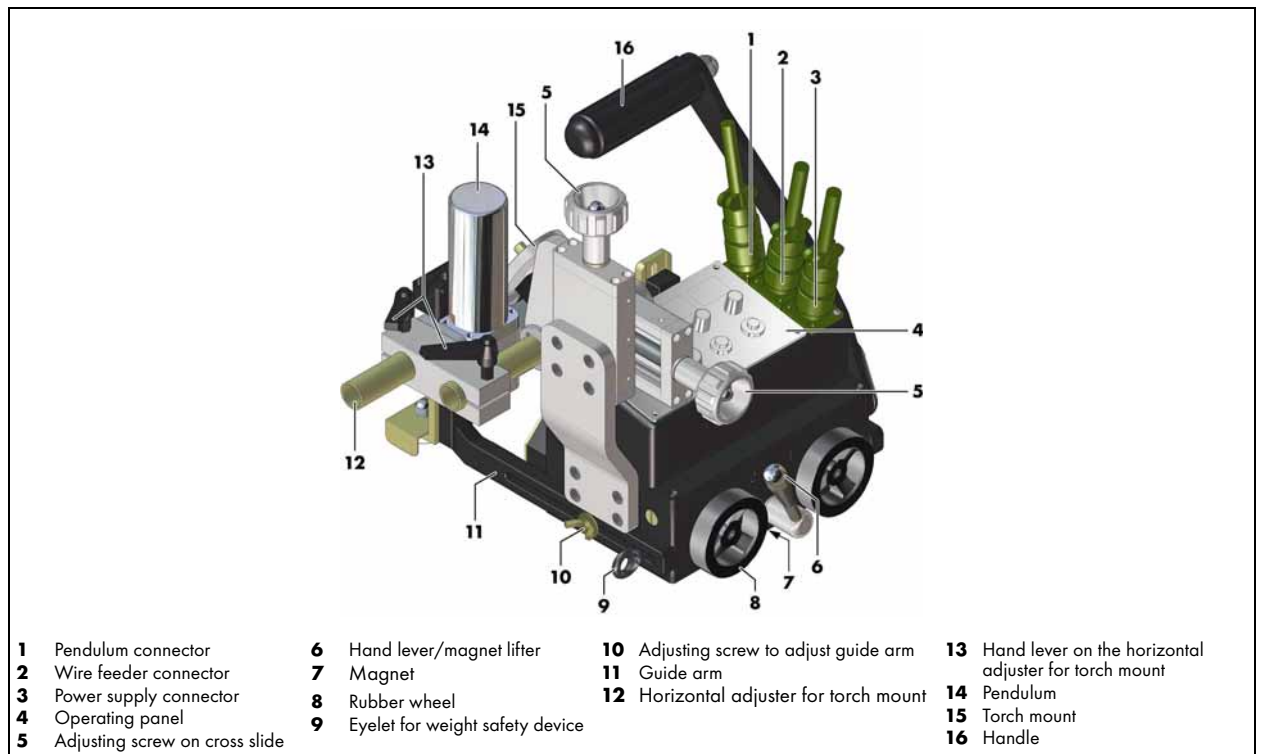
Overview of ABI-CAR E-1200-O – front view
